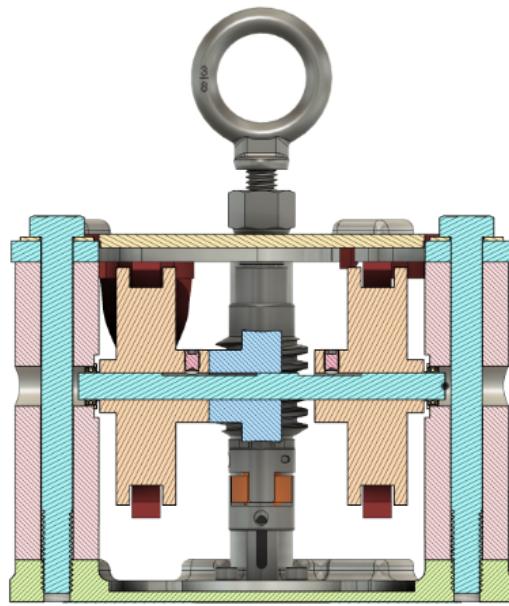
Cross section through the shaft of the BLiMS assembly upper section. In orange are the two spools. In light blue is the worm gear. In teal is the horizontal shaft and bolts. In pink are the bearing posts.
